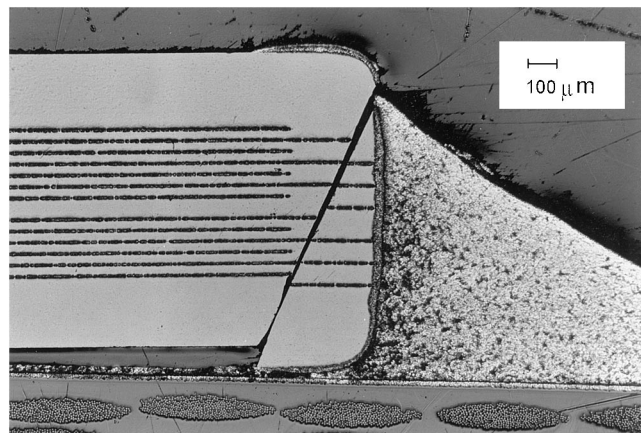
Polished cross section of a typical crack through a soldered MLC due to an external bending moment.
